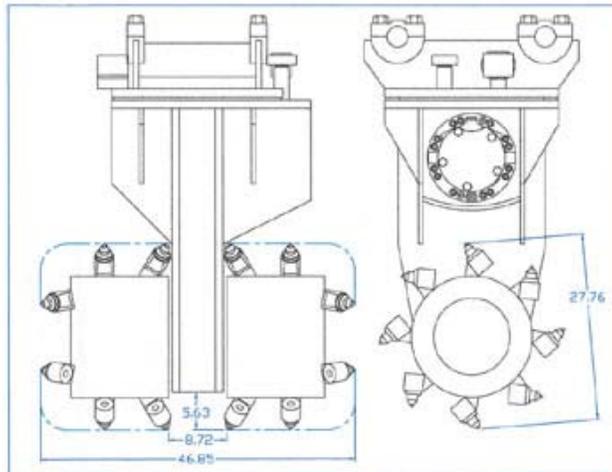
Lang Tool Company rock grinder on 290 LTC tool carrier.
